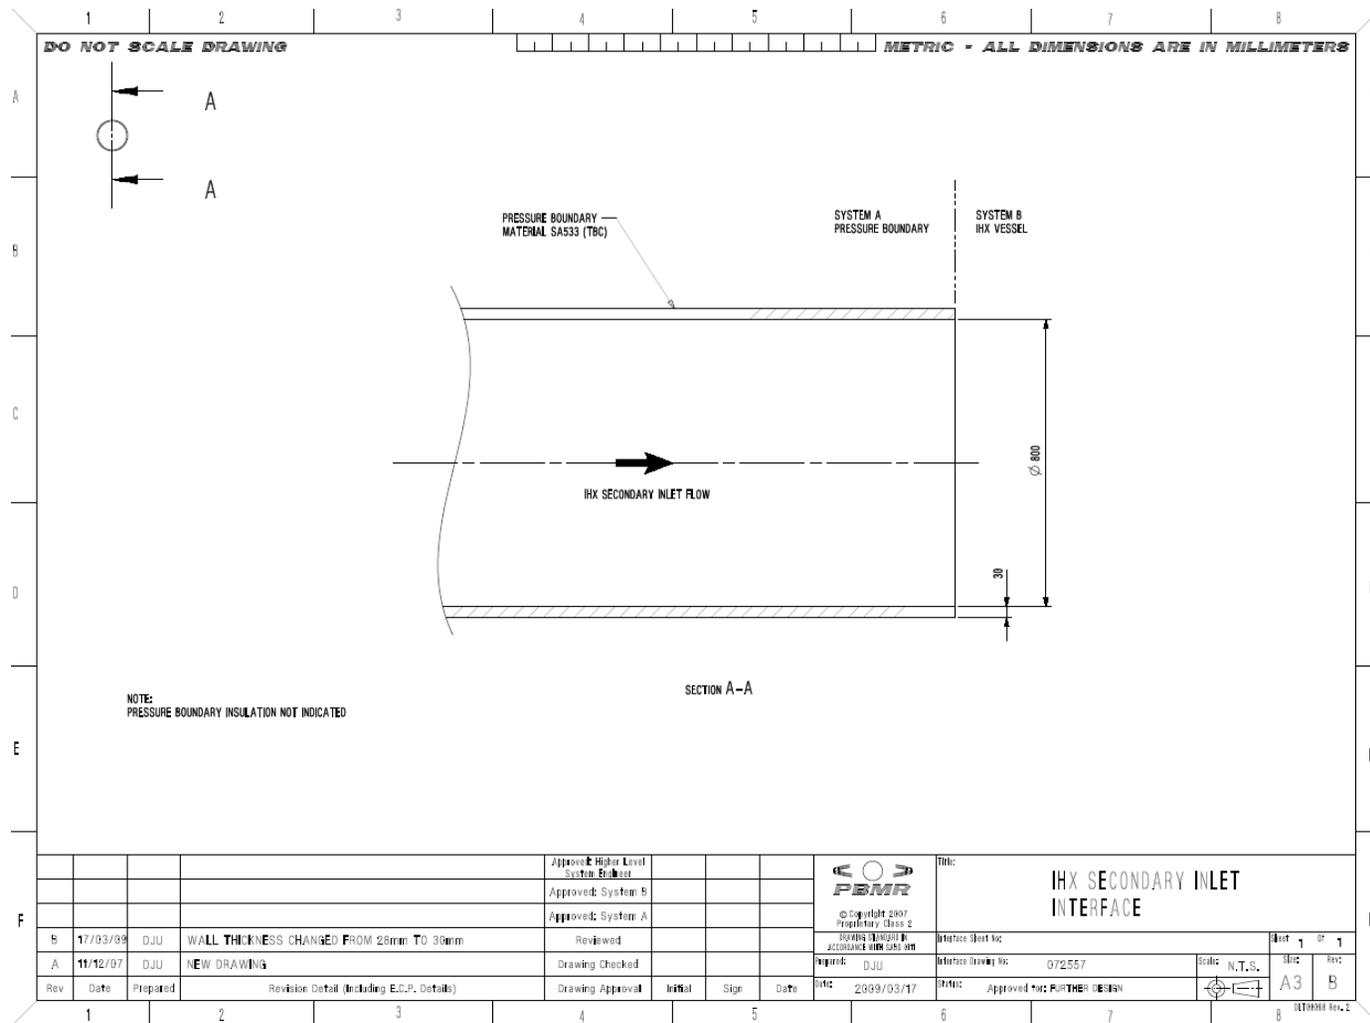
IHX-Secondary Inlet Pipe Interface Drawing (Pipe 4)
